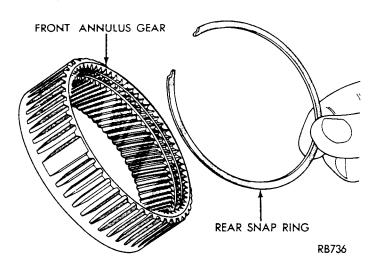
Front Annulus Gear Support Snap Ring LOW-REVERSE (REAR) SERVO
